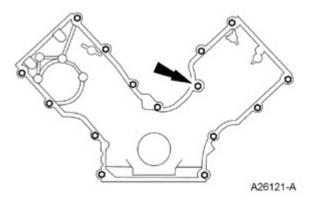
Locating Front Cover Fasteners Courtesy of FORD MOTOR CO.
